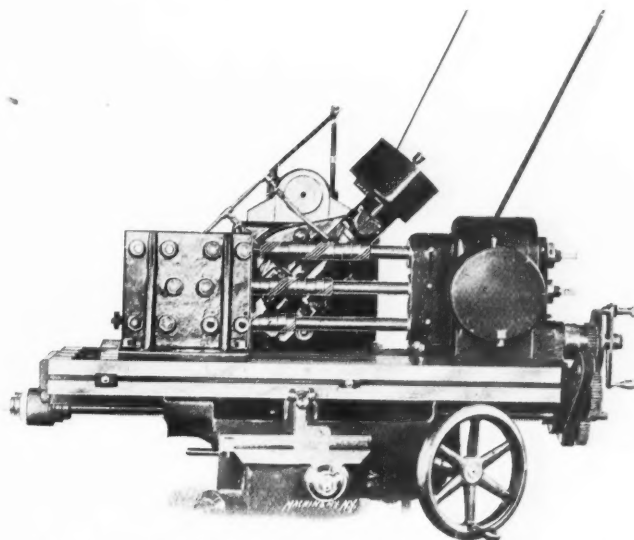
Adjustable Angular Cutter Spindle and Triple Spiral Head Attachments used on Milwaukee Plain Miller.
